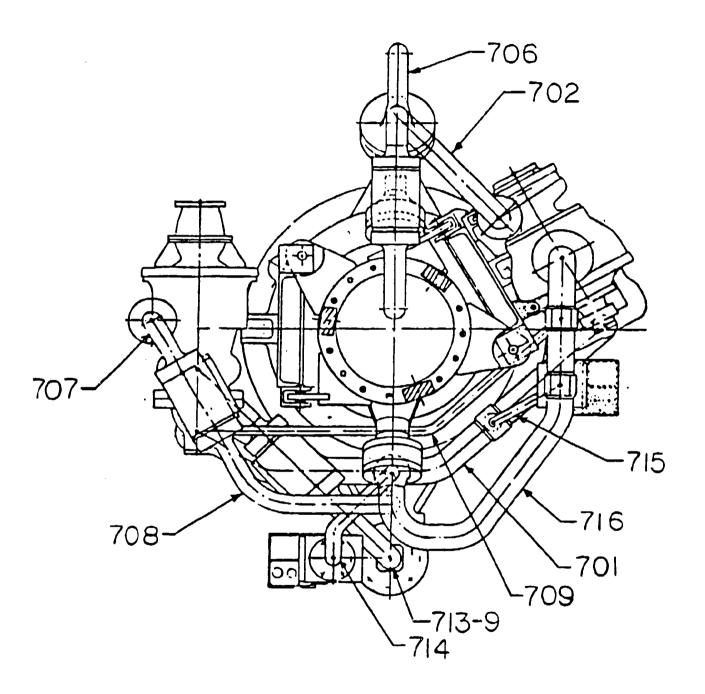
RS-44 DUCT ASSEMBLY LOCATIONS
